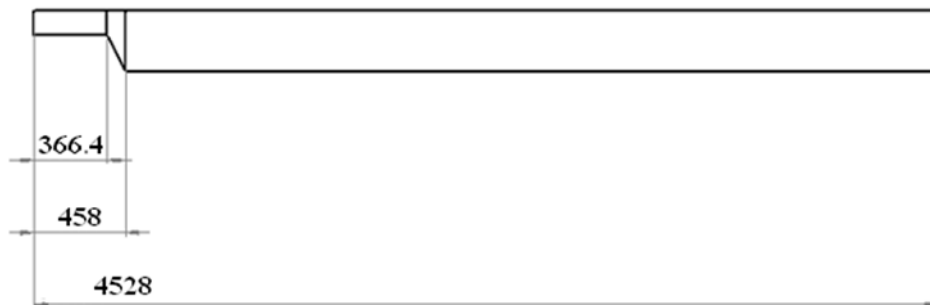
Technical Drawing of the Bo-105 Helicopter Blade (Dimensions are in mm).
